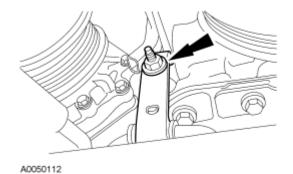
Transmission Cooler Tube Support Bracket Bolt Courtesy of FORD MOTOR CO.
